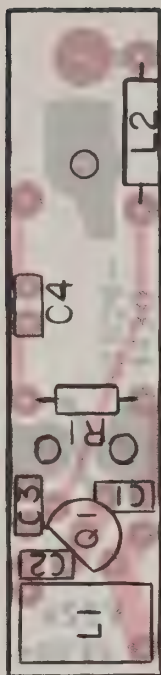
UHF Mixer Board Assembly A1, Component Location Diagram
